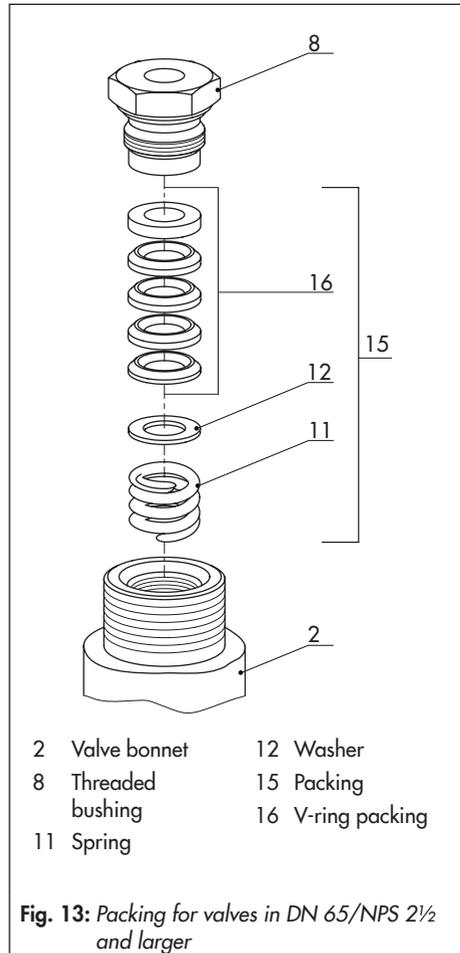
Packing for valves in DN 65/NPS 2½ and larger
